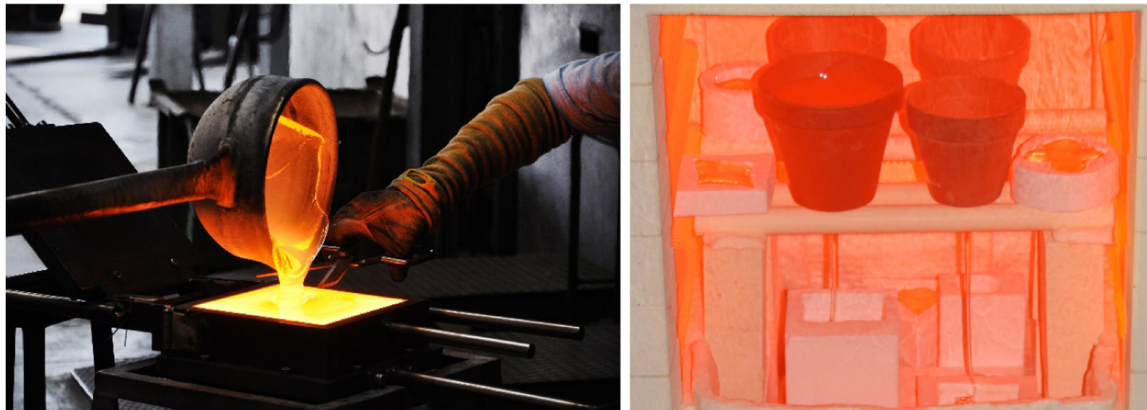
Left: Primary casting method (hot-forming). Right: Secondary casting method (kiln-casting).
